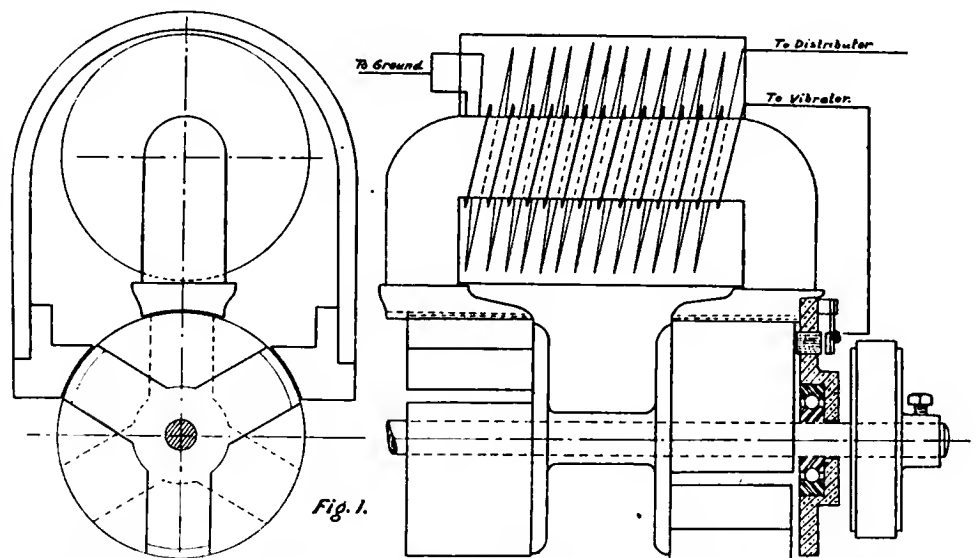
End and side elevations of the new Miller magneto, showing disposition of the windings.
